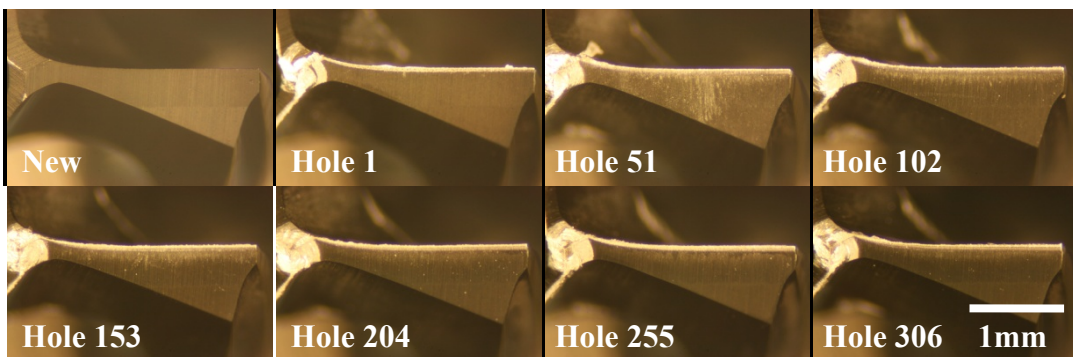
Tool wear micrographs of Graphit-iC™ drill under 3bar cutting fluid, 260m/min cutting speed (Test 4)
